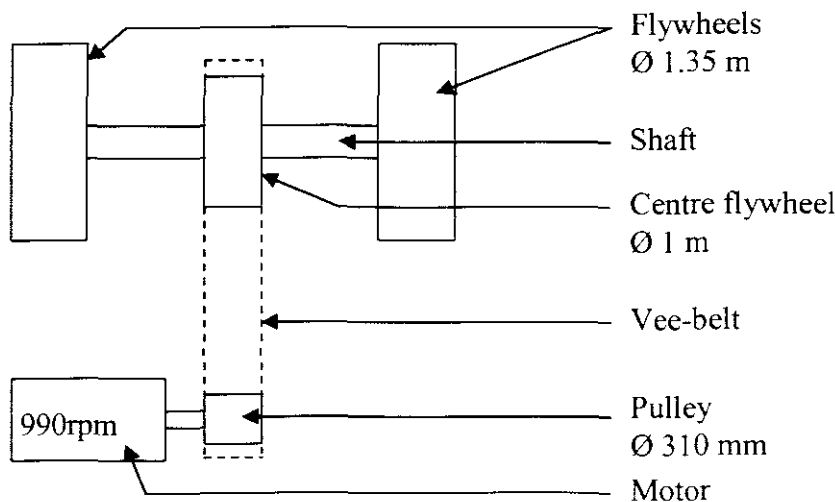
Frame Saw 1 Mechanical Flywheel Configuration
